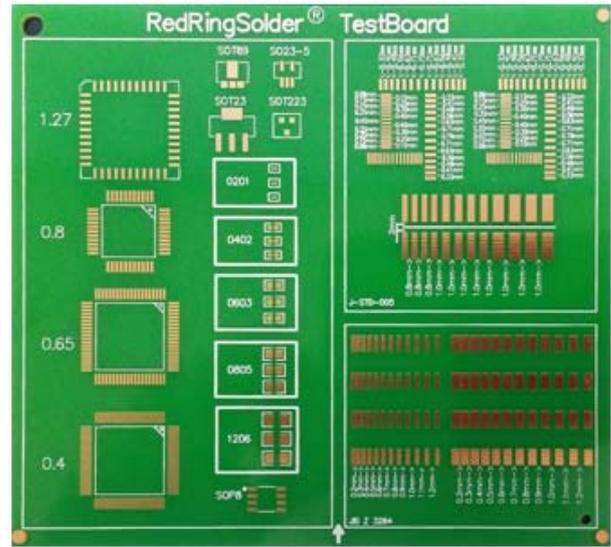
Printed circuit board (PCB) from Red Ring Solder (M) Sdn. Bhd. with Copper (Cu) substrate
